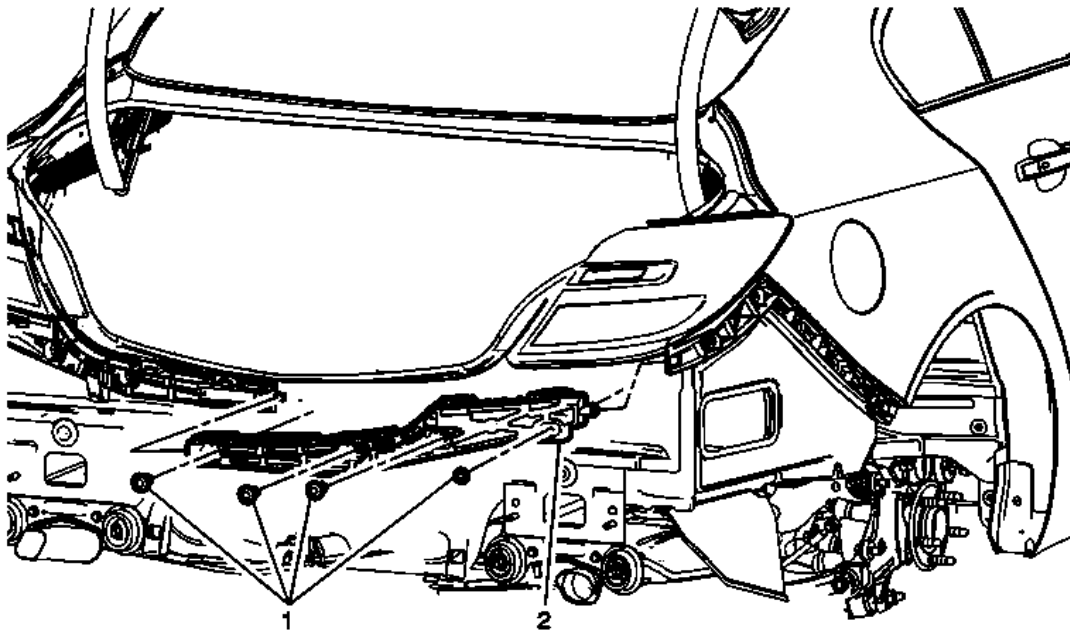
Rear Bumper Fascia Guide (Right Side)
